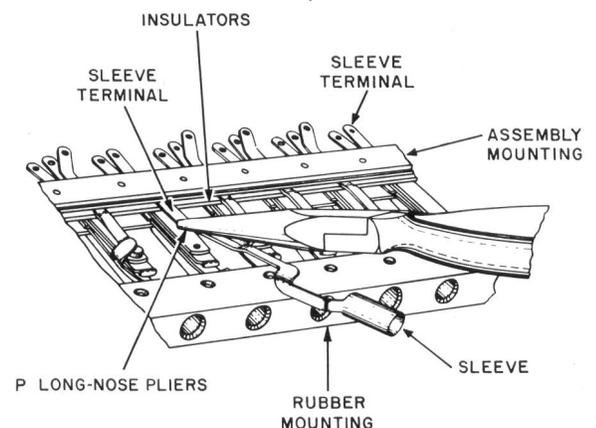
Method of Forcing Sleeve Terminal into Assembly Mounting in 92- and 292-Type Jacks
